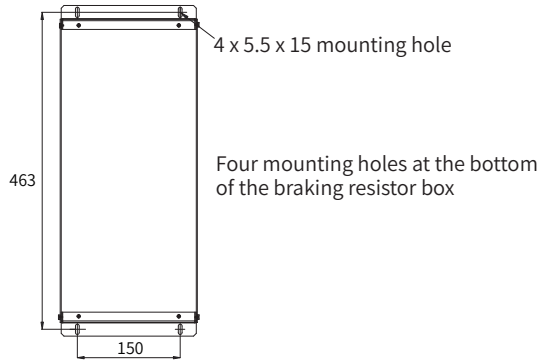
Locations and dimensions of the mounting holes at the bottom of the braking resistor box (unit: mm)
